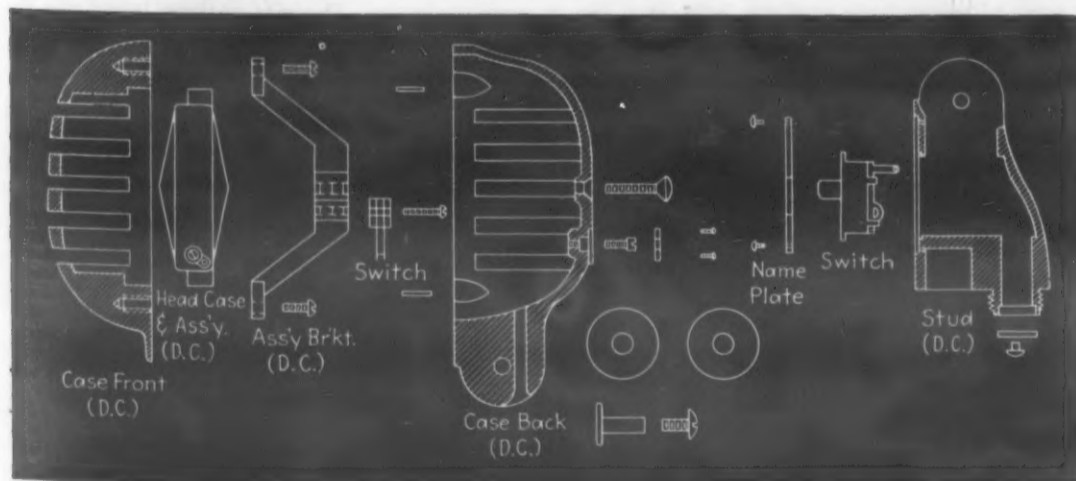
Drawing showing a sectional exploded view of one microphone and its supporting parts. Those marked (D.C.) are zinc alloy die castings.
